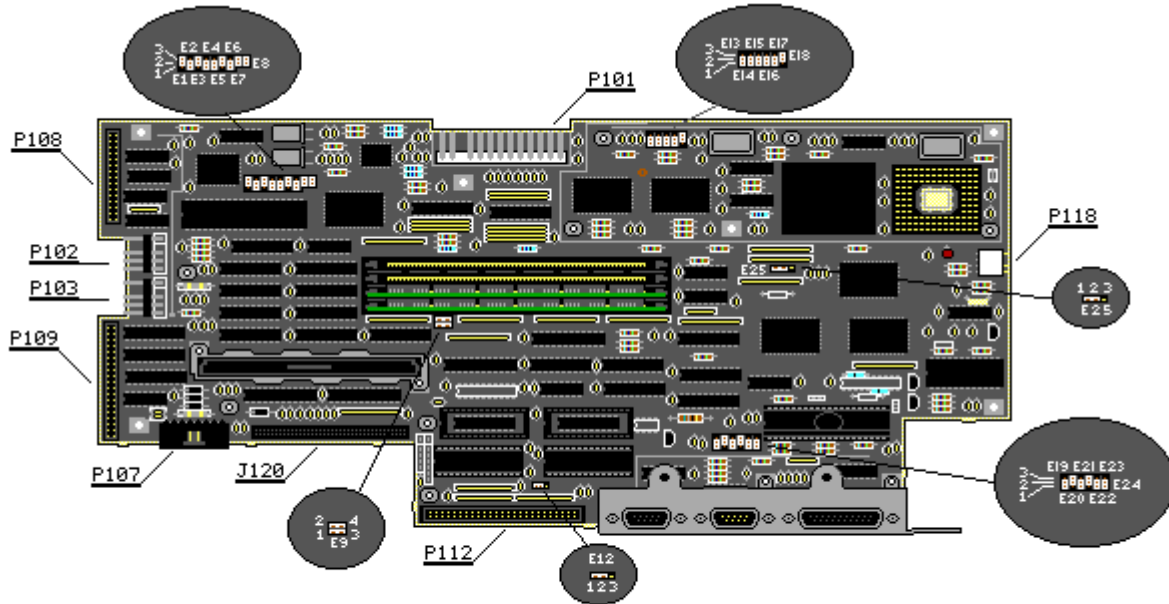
System Board Jumper Locations (Assy No. 000510)
